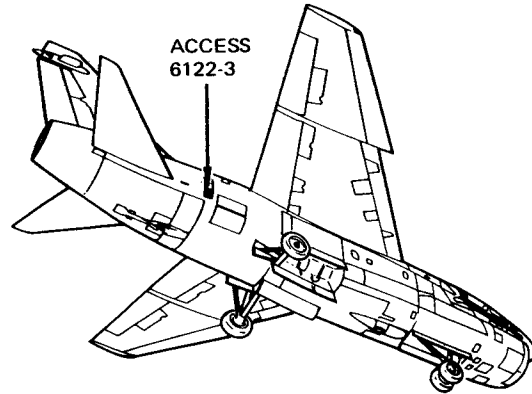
Test Probe Installation (Using 6872929 Test Set); IGV Angle
